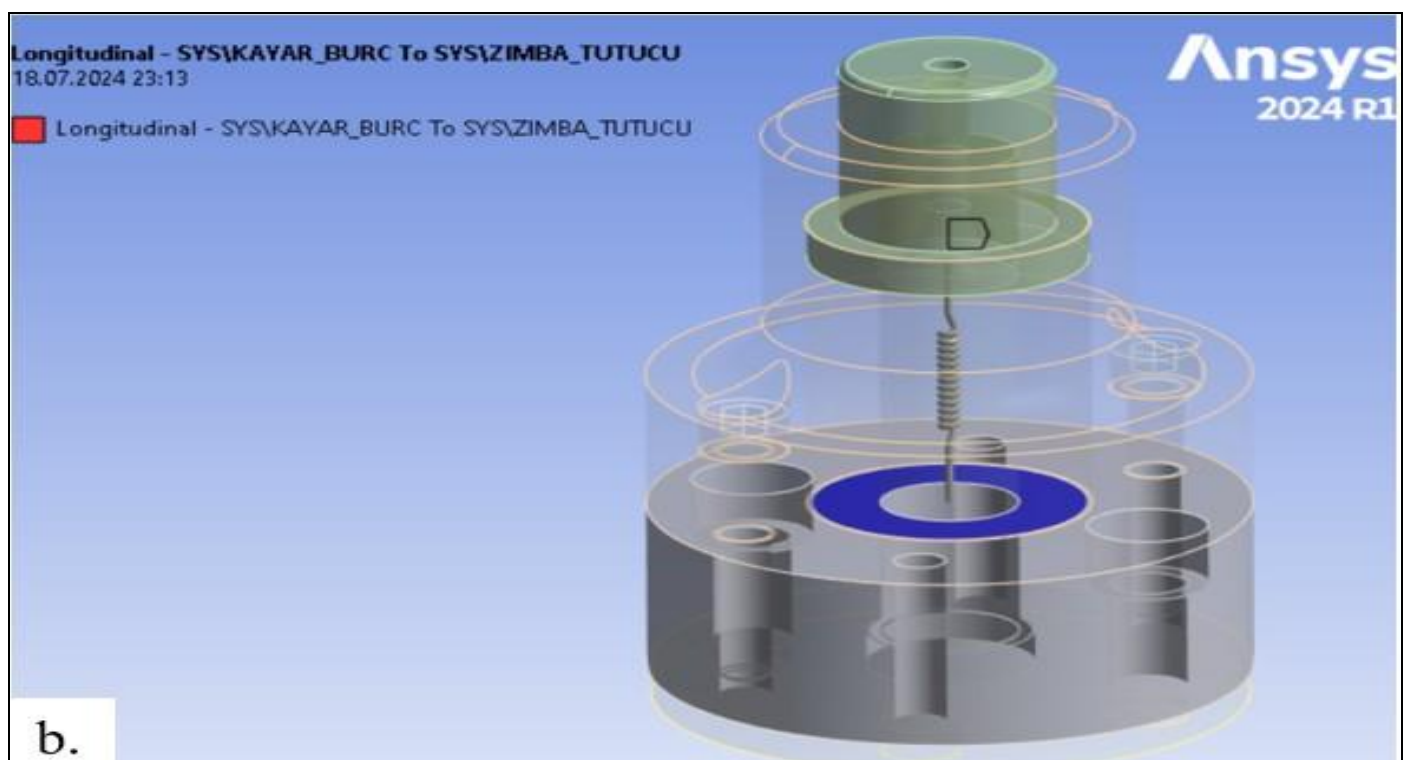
Spring Contact of the Circular Punch Holder Mechanism
